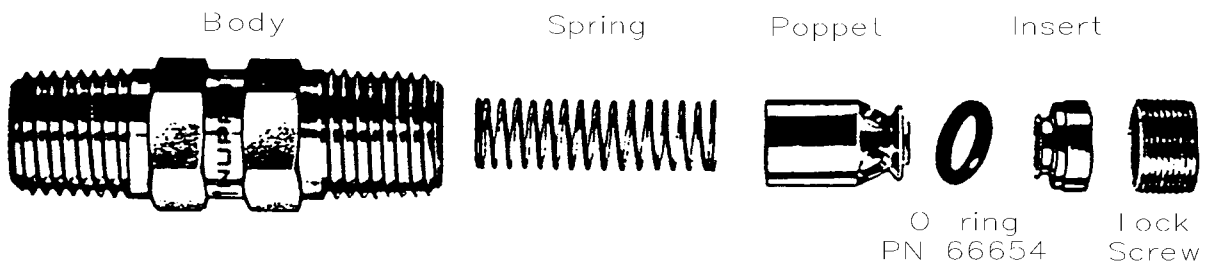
N₂ Inlet Check Valve Assembly (PN 60263)
